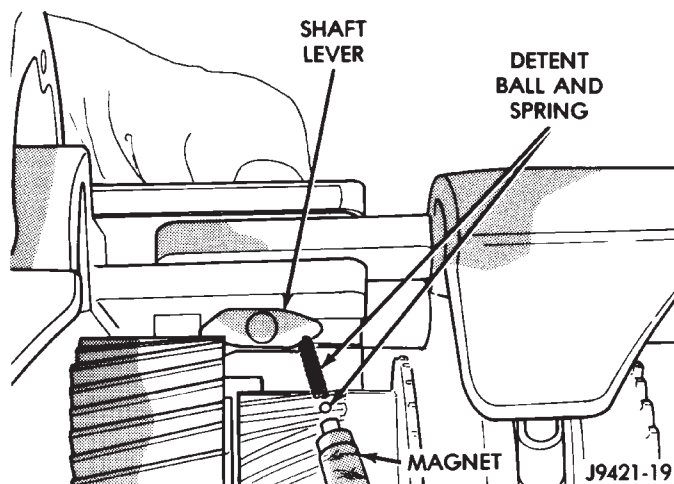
Removing Shift Shaft Lever Detent Ball And Spring
